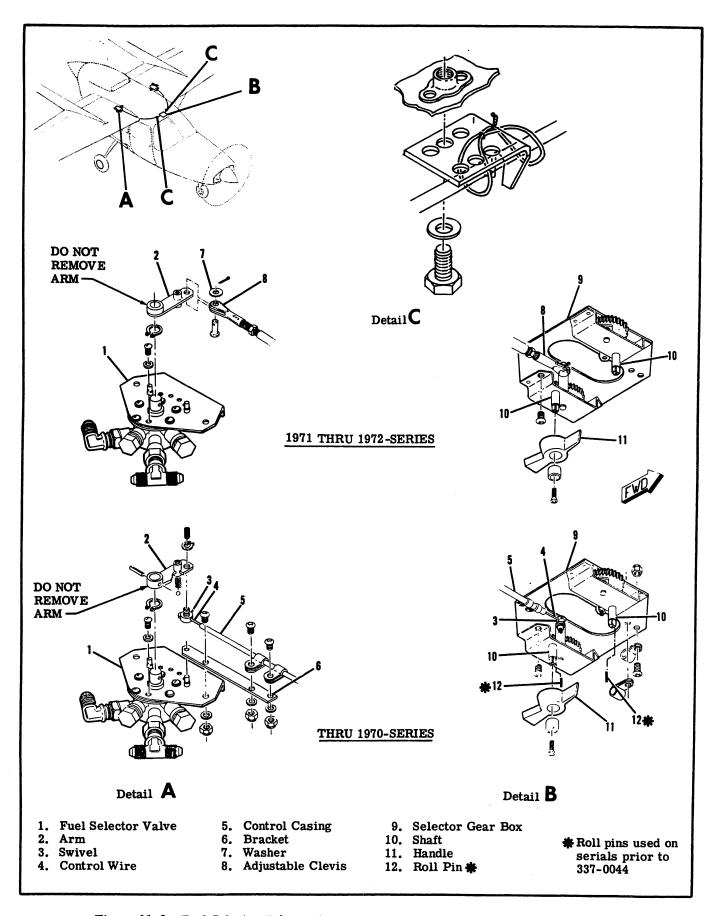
Fuel Selector Valve and Fuel Selector Gearbox Installation (Sheet 1 of 2)
